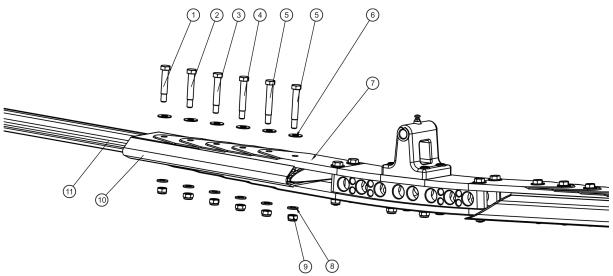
Disassembly rotor - teetering parts (Effectivity: RS II)
